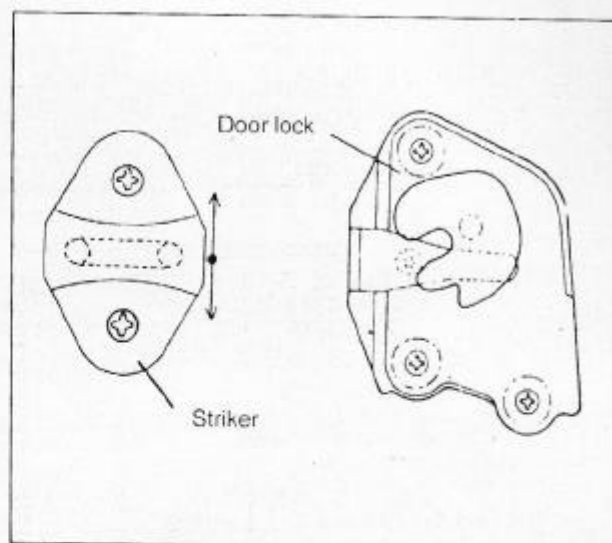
17 STRIKER ATTACHMENT POSITION
